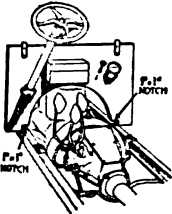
A—To remove the Ford engine from the frame without raising body from frame; take a hacksaw and cut out a square 1 in. by 1 in. on each side of the dash. (Motor World.)
